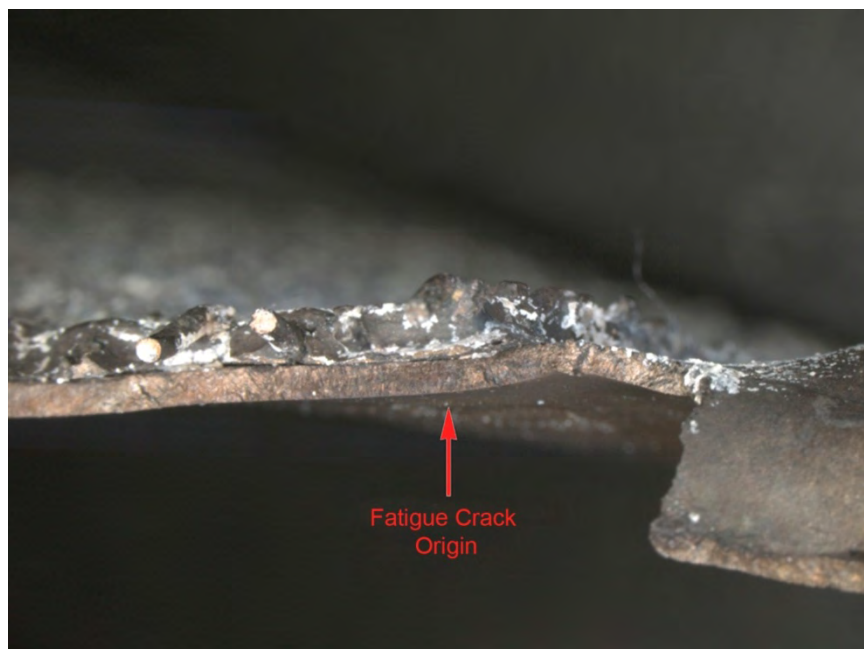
Close-up of the primary fracture surface showing the fatigue crack origin
